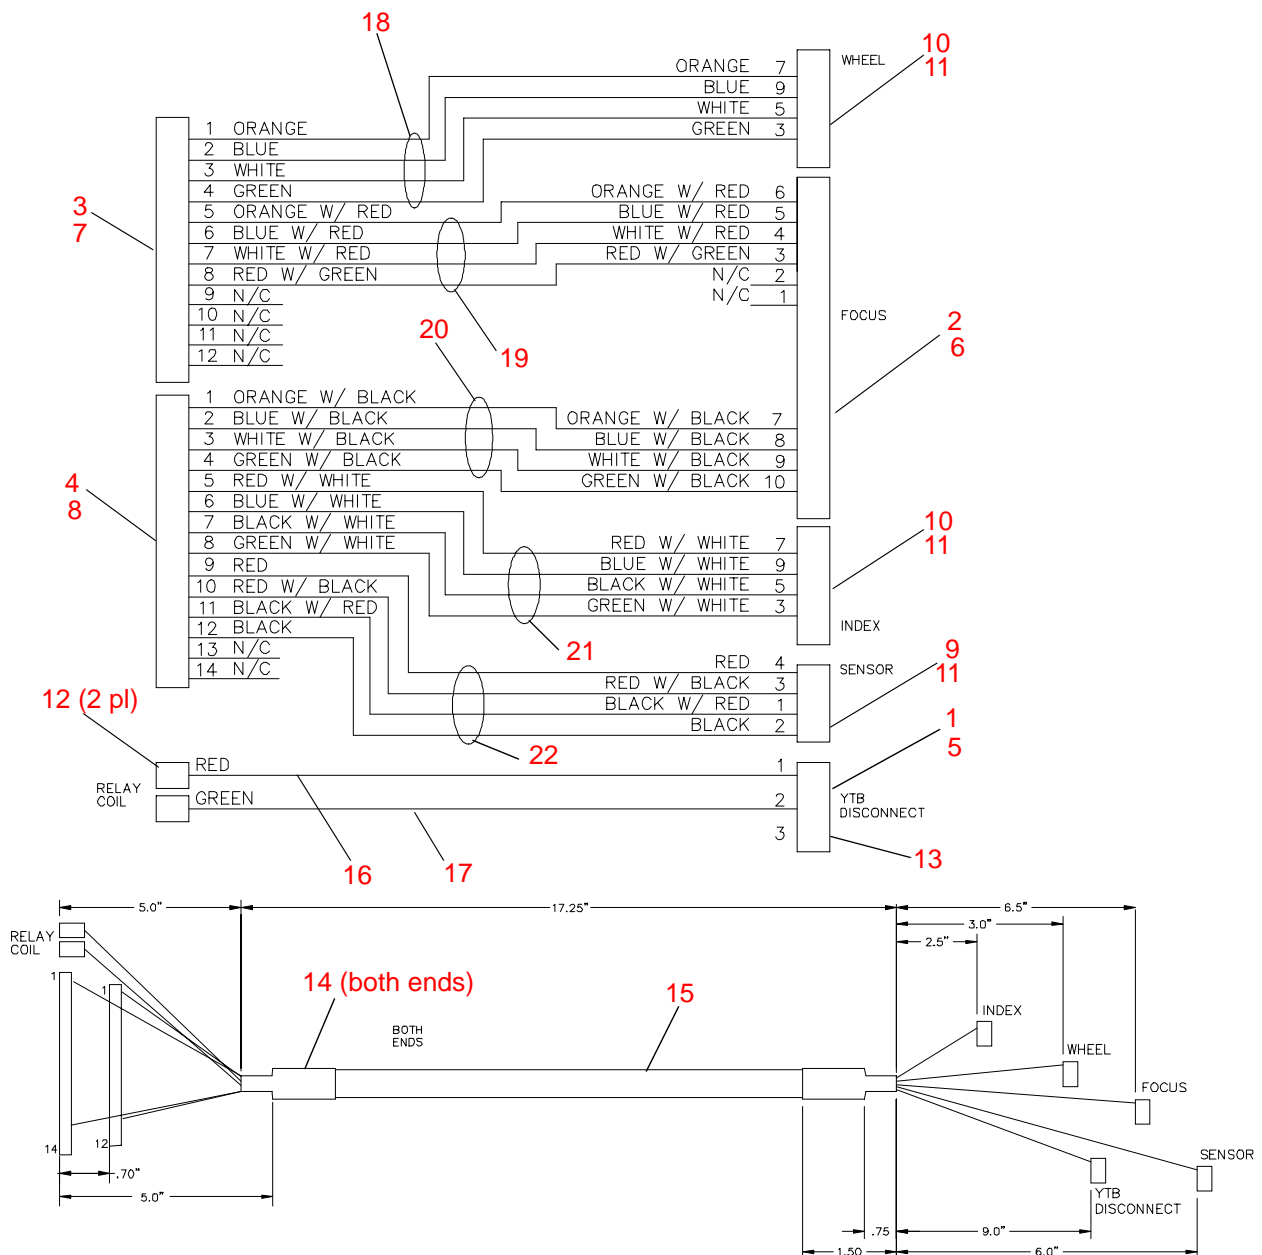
VL6B/VL6C Motor Harness Cable Assembly
